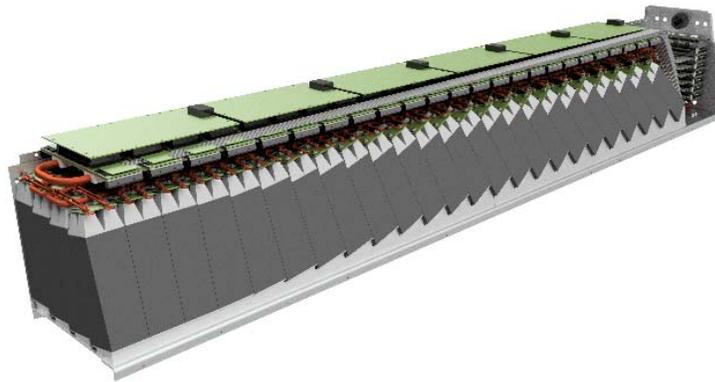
Final design of a complete sector with all blocks, readout electronics, cables and cooling inside.
